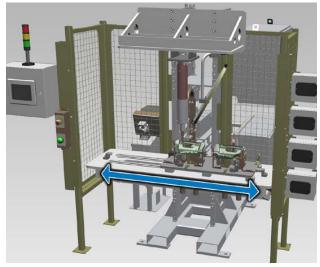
Projection weld actuator and ServoPlace actuator fixed and rodless linear actuators move parts into position.
